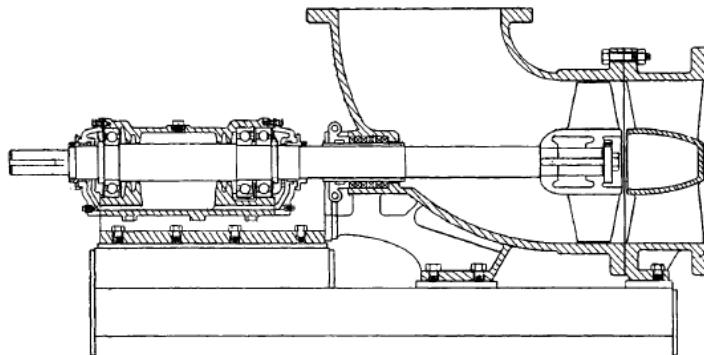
Horizontally mounted axial-flow pumps, Bearing frame, Hydraulics Institute [2]
